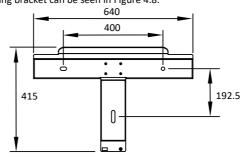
Dimensions of the mounting bracket (unit: mm)
